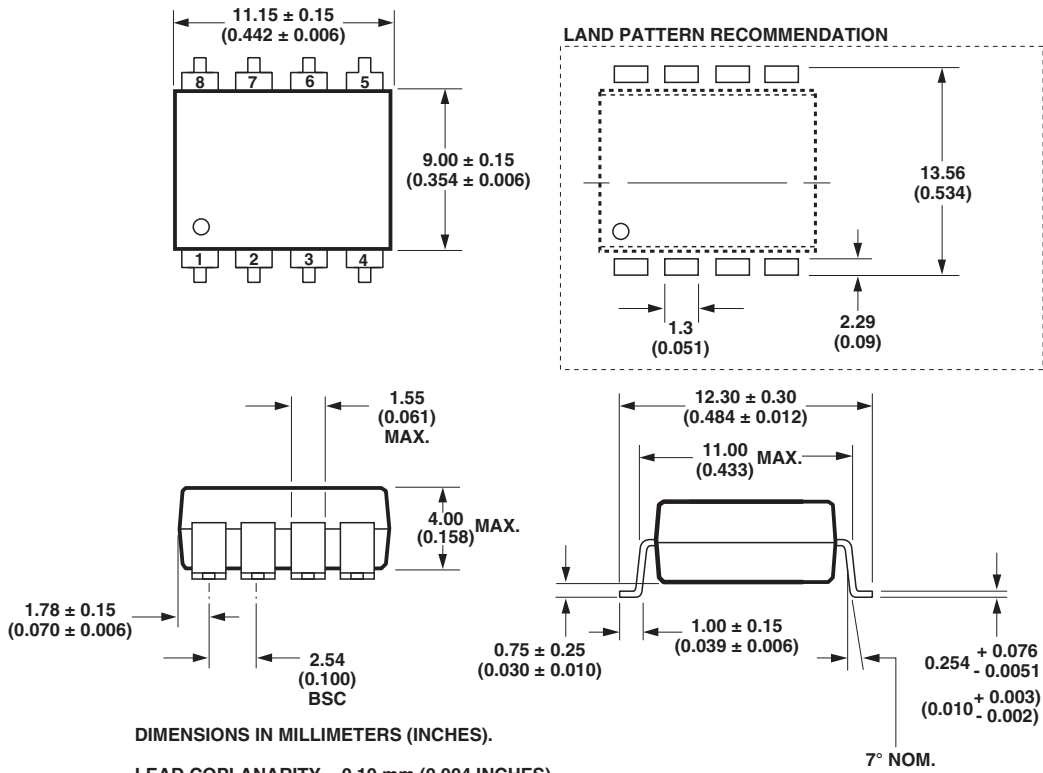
HCNW4506 Gull Wing Surface-Mount Option 300 Outline Drawing
